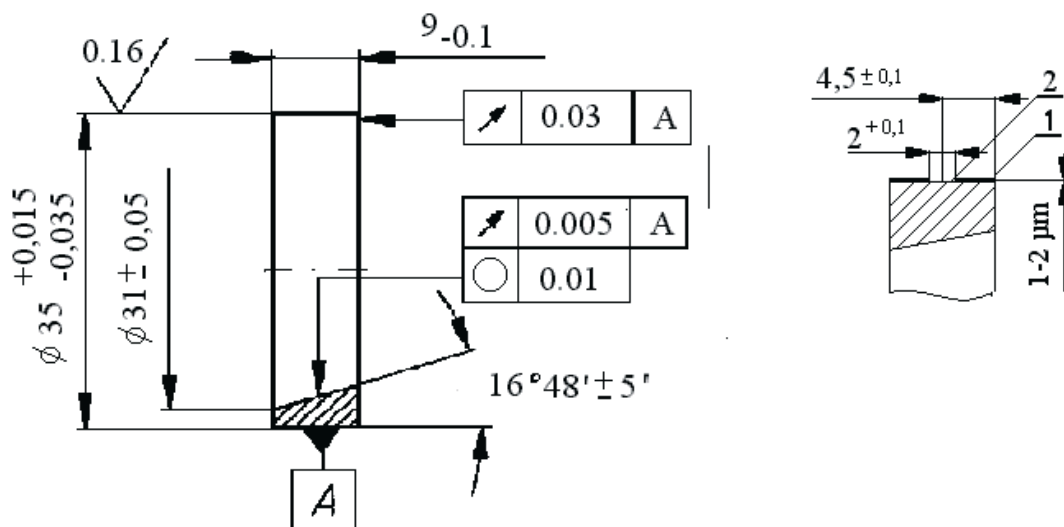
The shape and dimensions of "ring" structure samples: 1 - coating, 2 - 46Cr2 steel sample material
